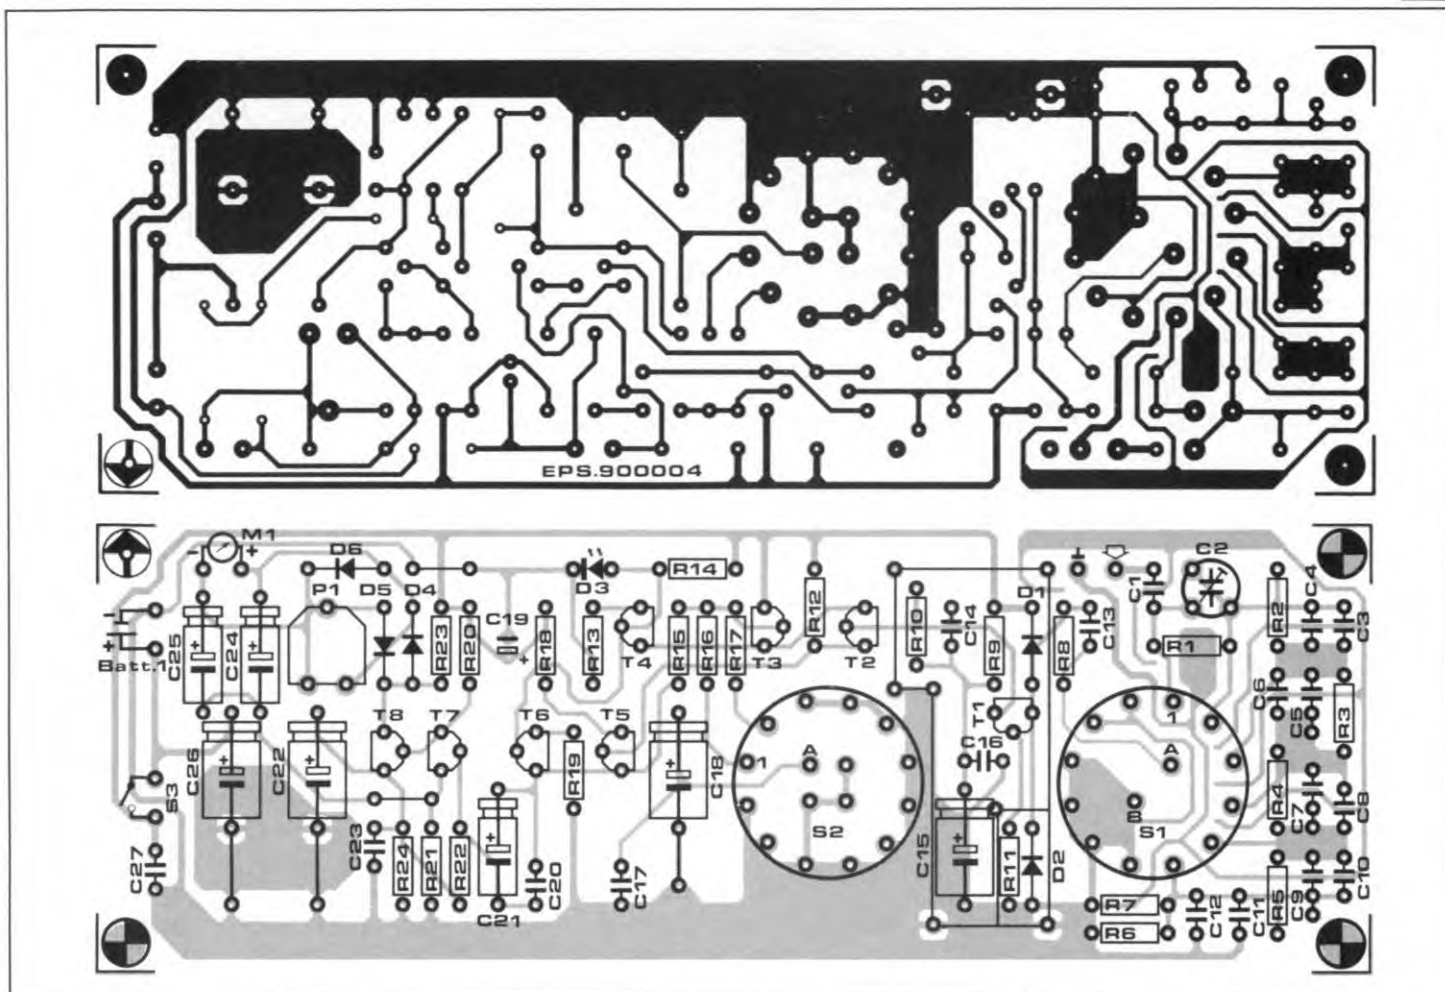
Track layout and component mounting plan of the single-sided printed-circuit board for the millivoltmeter.
